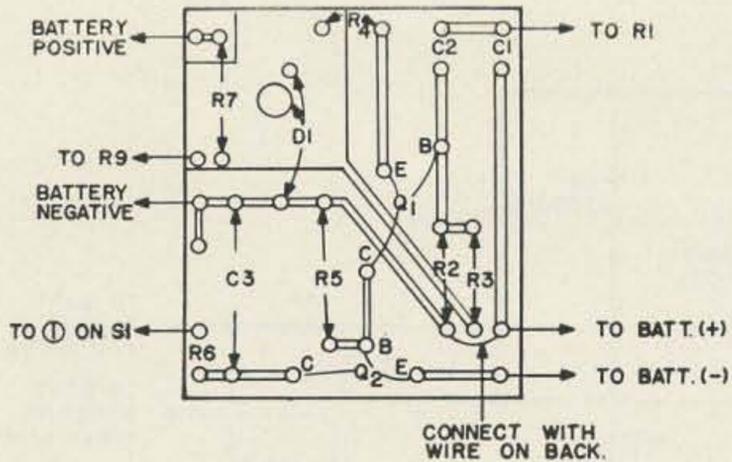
Schematic drawing of printed circuit board and wiring on S1.
